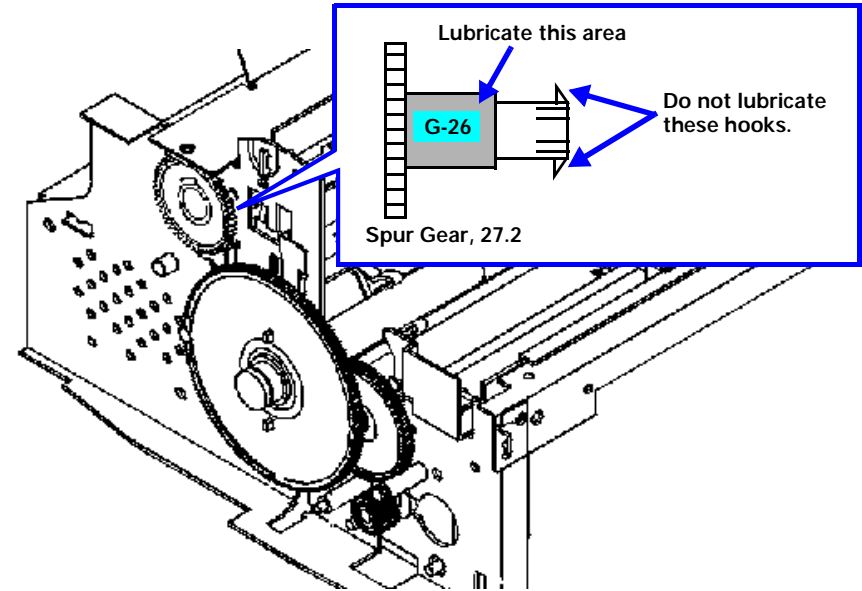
#11 Gear 34 (ASF Roller Gear)
